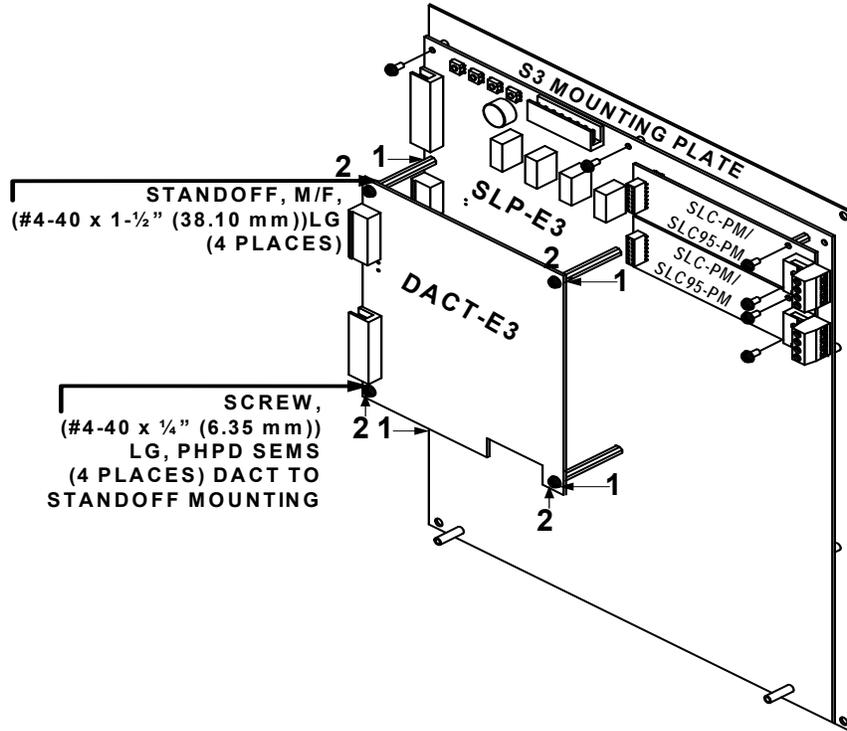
DACT-E3 Circuit Board Installed to a Mounting Plate
